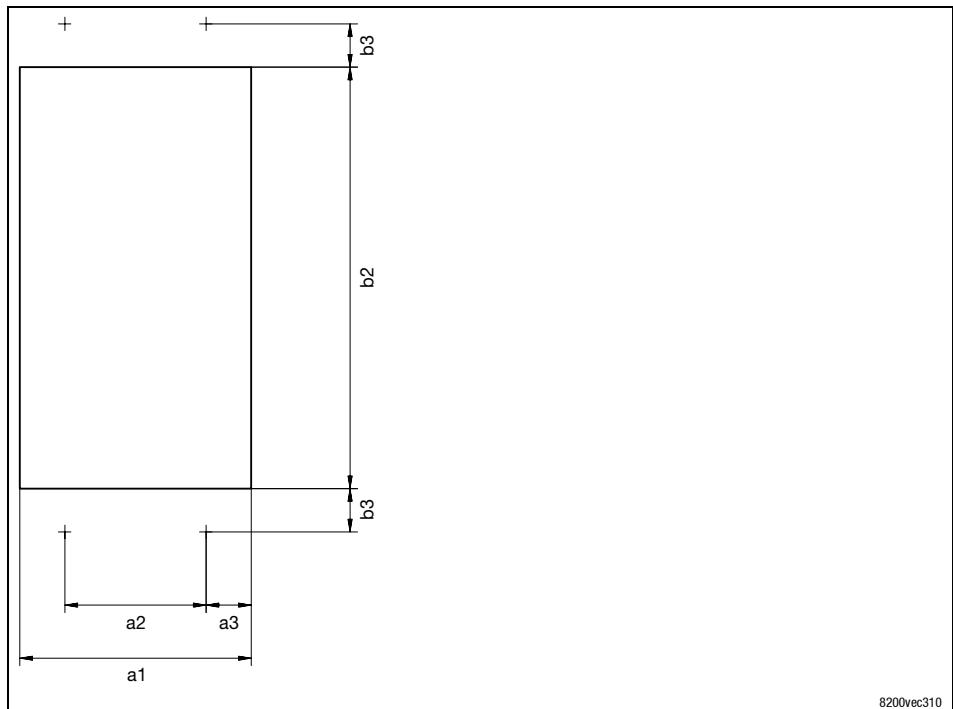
Dimensions for thermally separated mounting cutout 3 ... 11 kW
